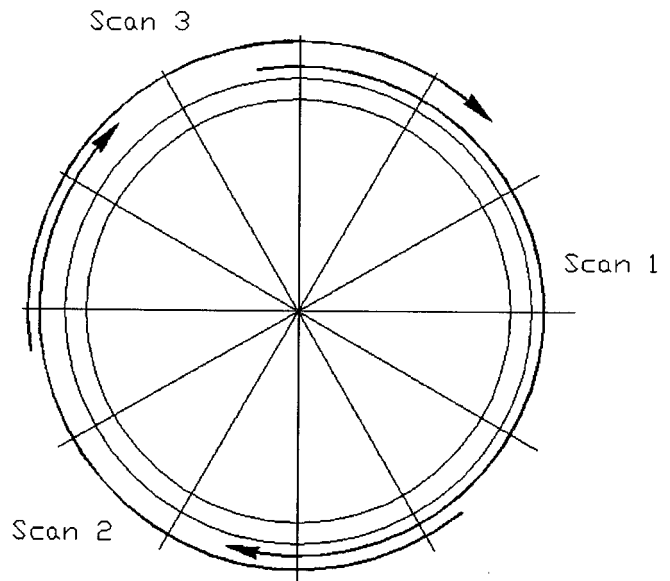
Scanning Pattern for a Circumferential Weld
